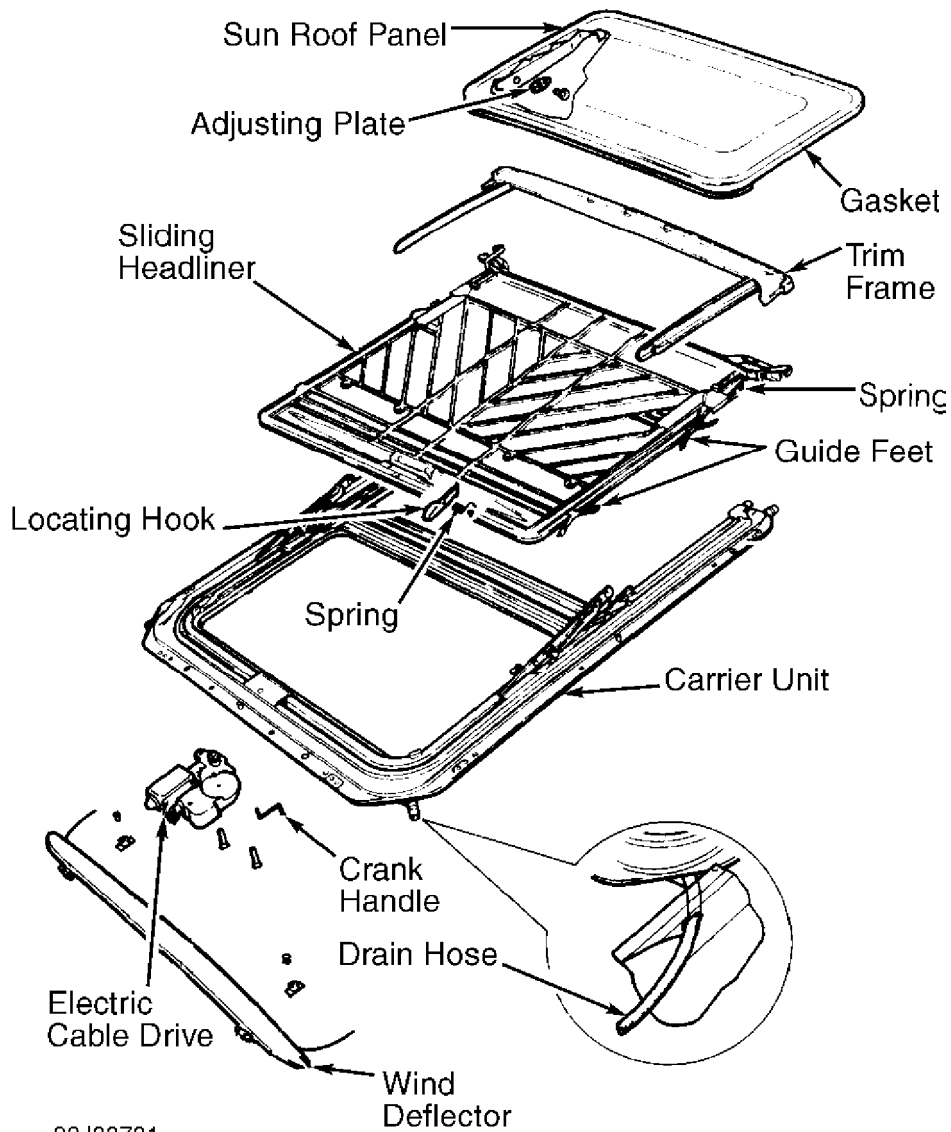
Exploded View Of Power Sun Roof Assembly
